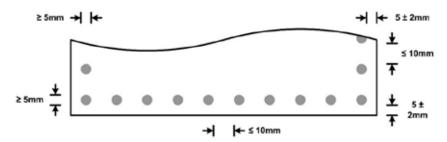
Standard One-Piece Letter Mailer - Spot Weld Requirements (Not to Scale)
